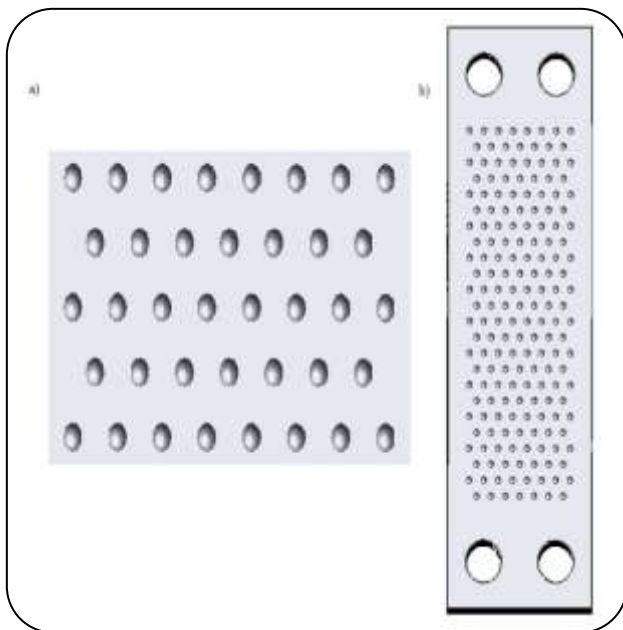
Dimple geometry a) staggered arrangement b) Dimple plate.
